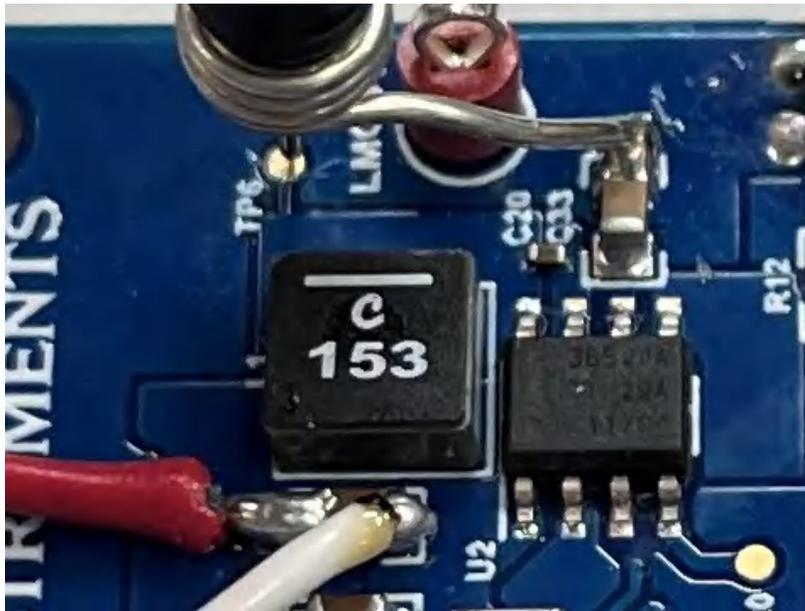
Soldered Output Wires and Scope Probe and Barrel Test Setup
